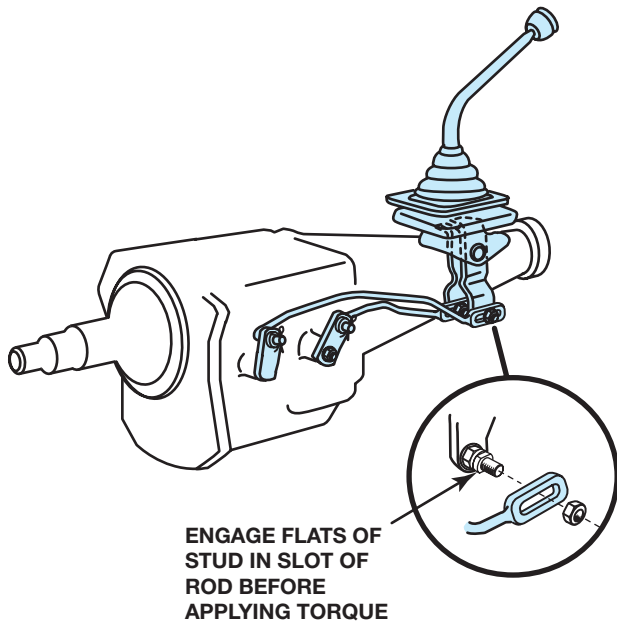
This transmission-mounted shifter has a hole so an alignment pin can be inserted to hold the shift levers in neutral. The shift rods are adjusted at the shifter end.
